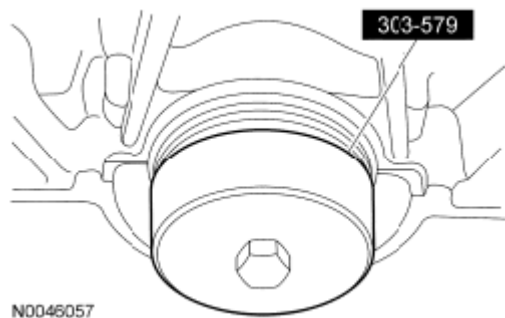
Identifying Crankshaft Rear Oil Seal Installer
